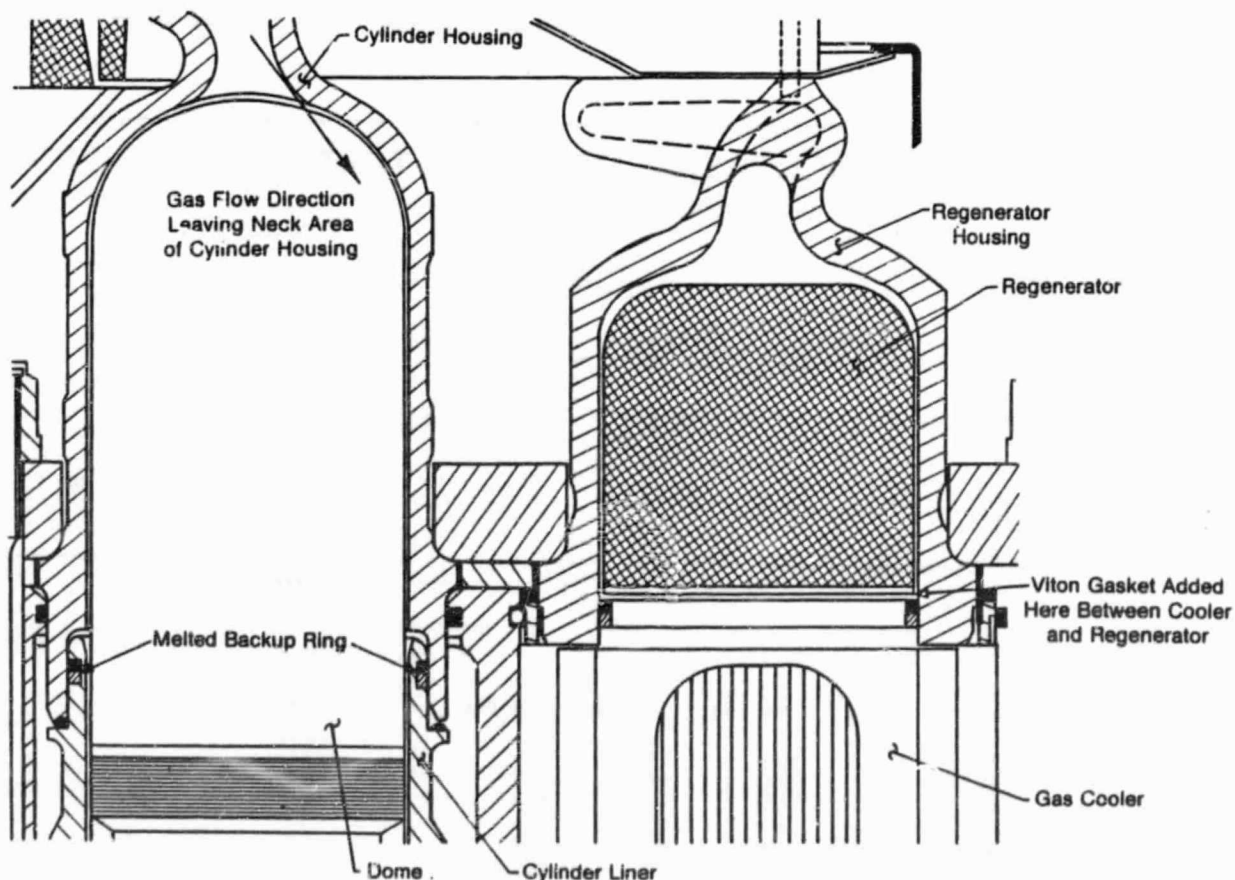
Upgraded Mod I Cold/Hot Engine System
